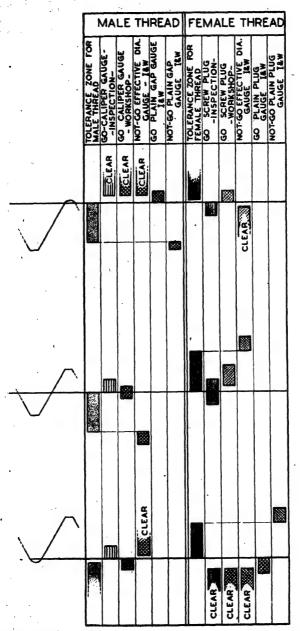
Thread Tolerance Gauging Diagram—Metric and American 60° Threads to B.S.I. Standards
